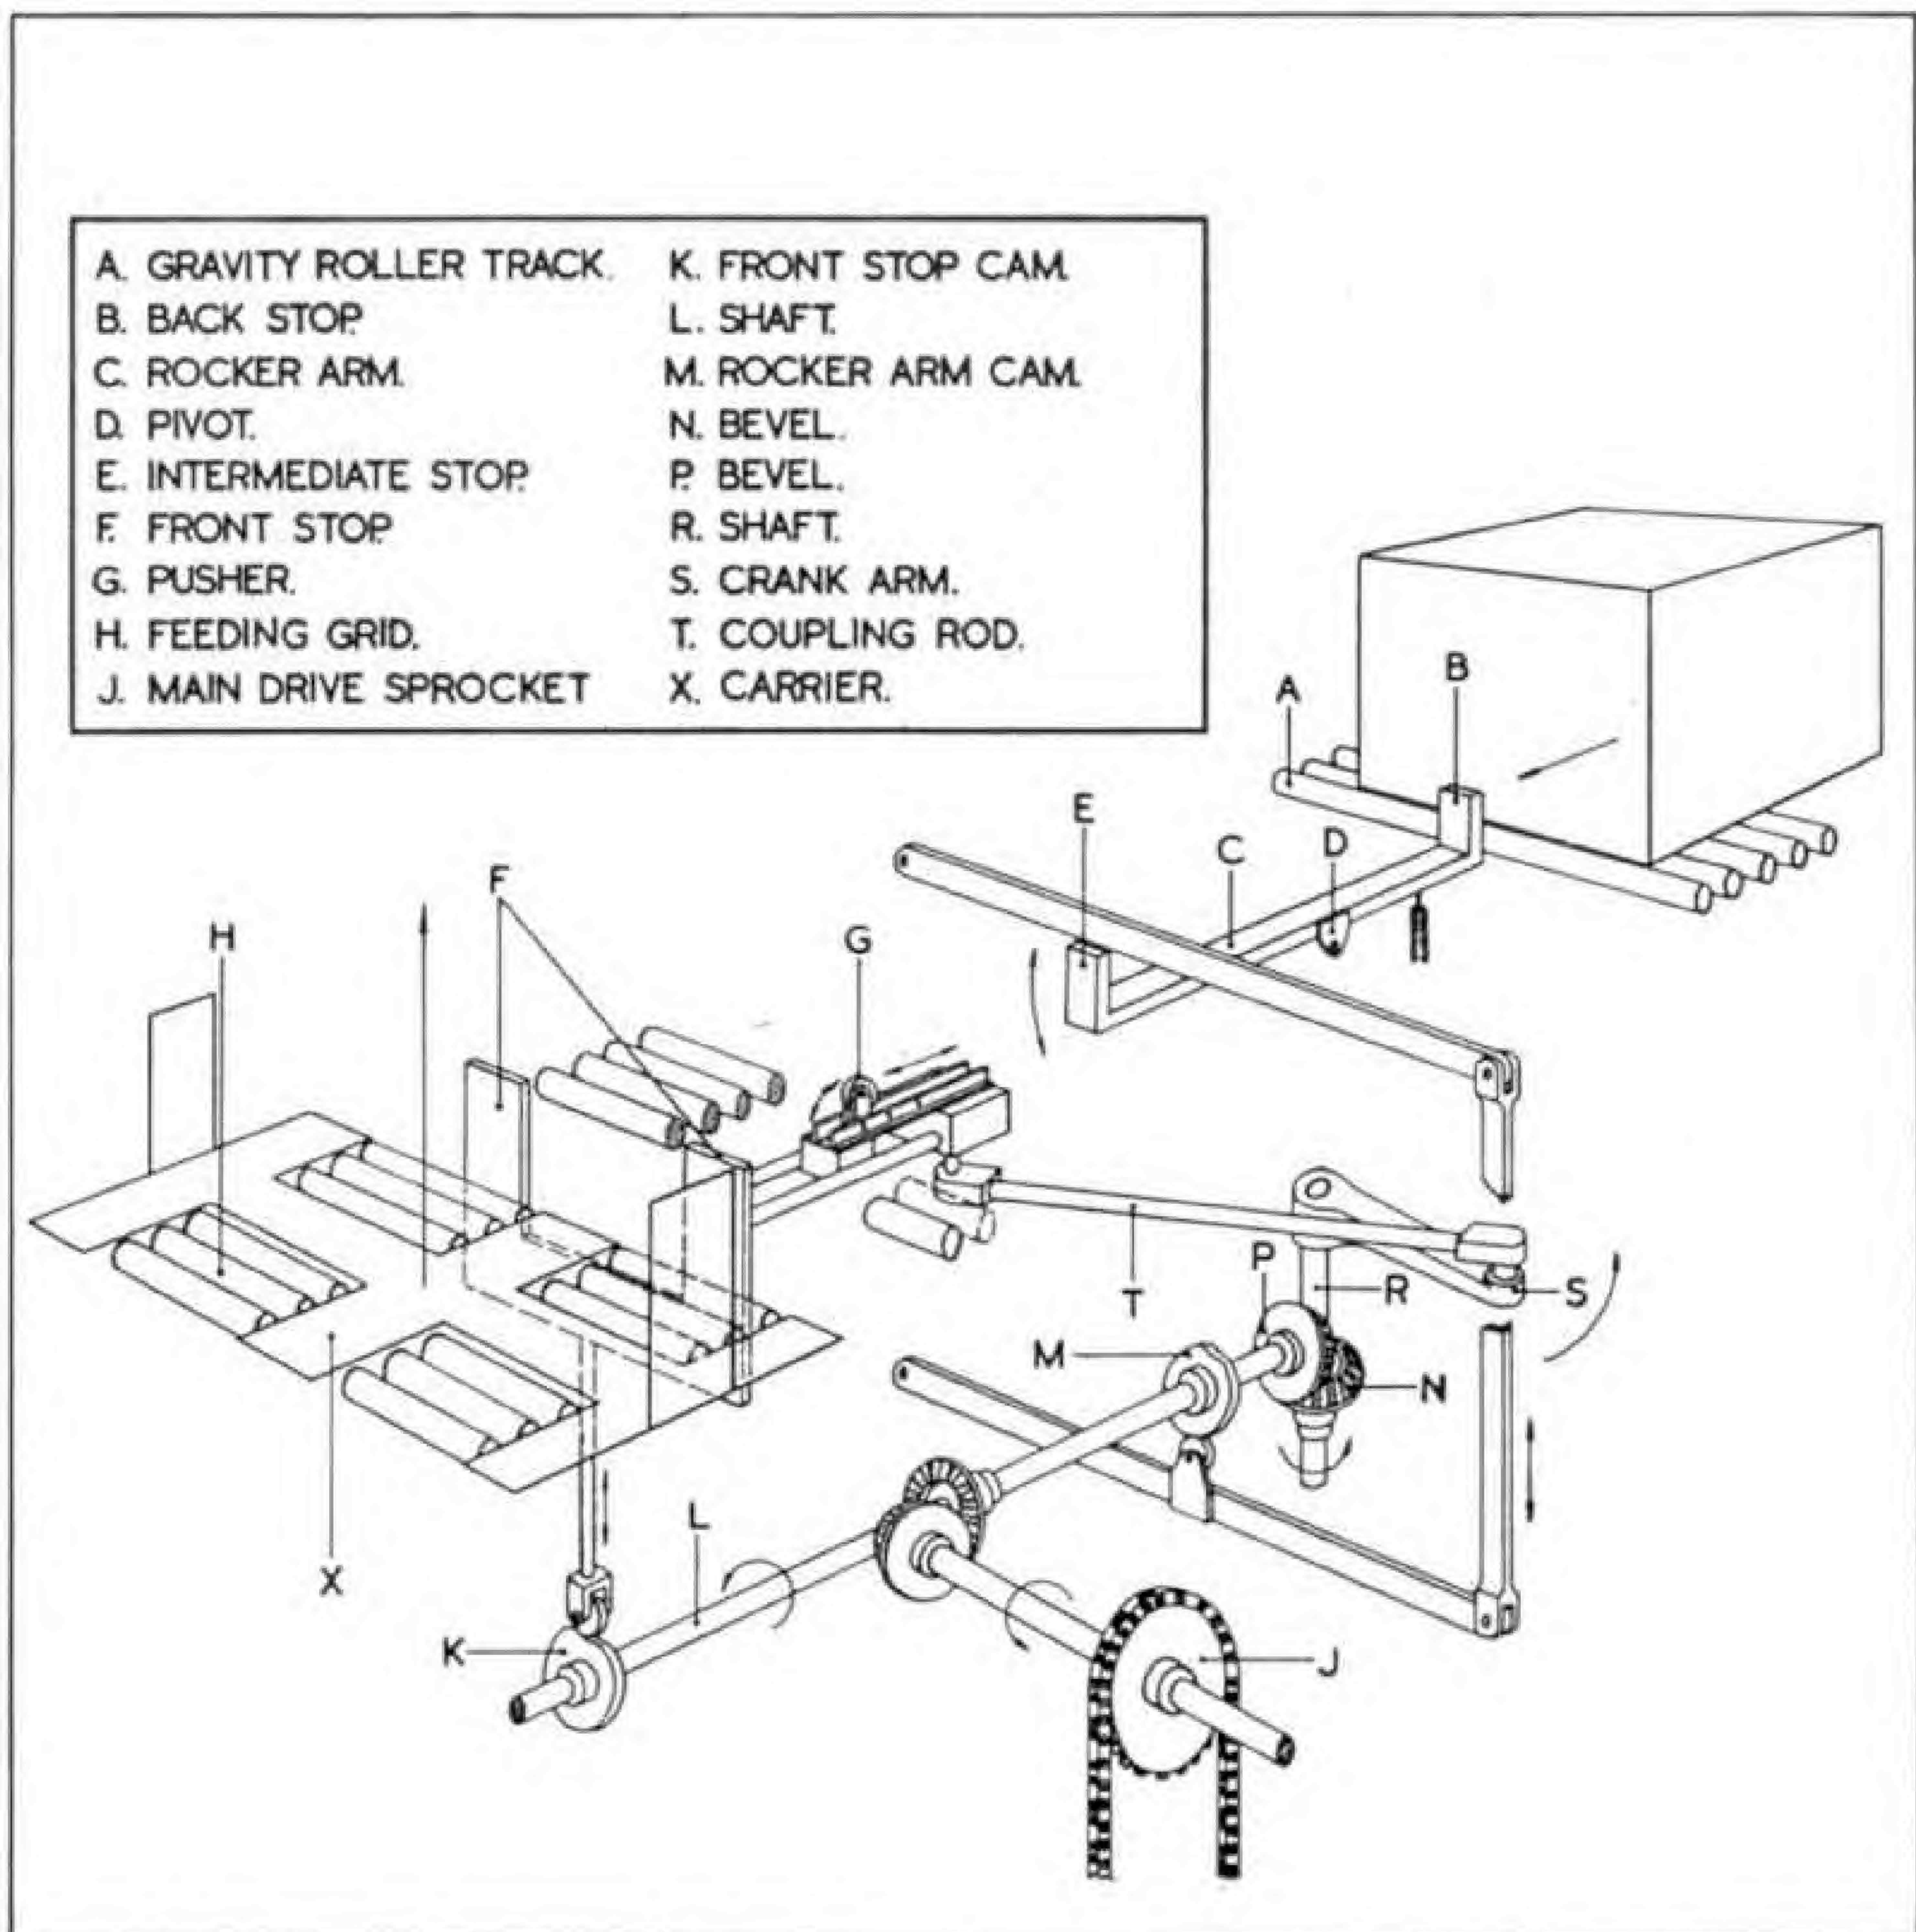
A sectionalised drawing showing the mechanical details of the feed-in interrupter mechanism of The VertiVeyor.
